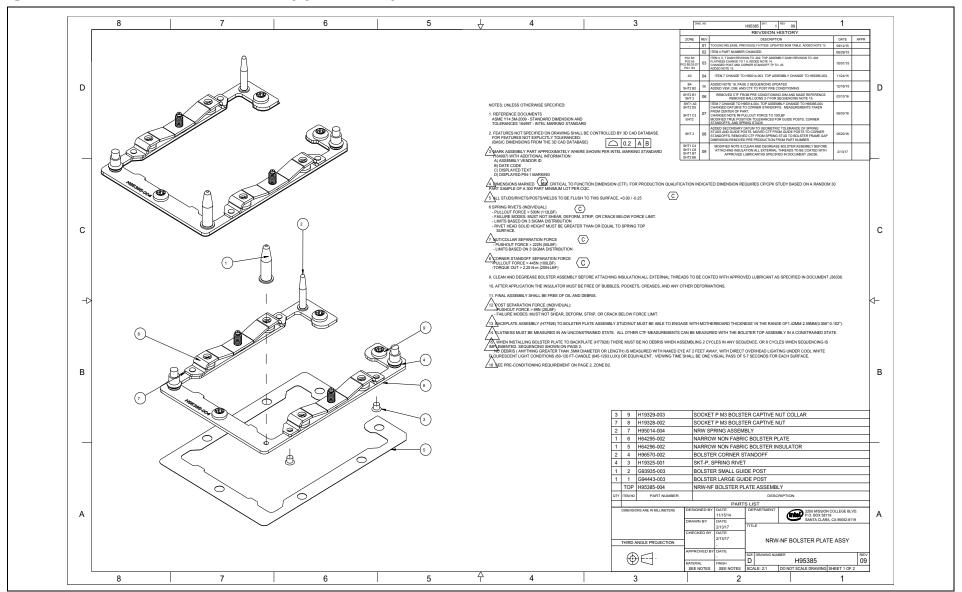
Narrow Bolster Plate Assembly (Sheet 2 of 2)
